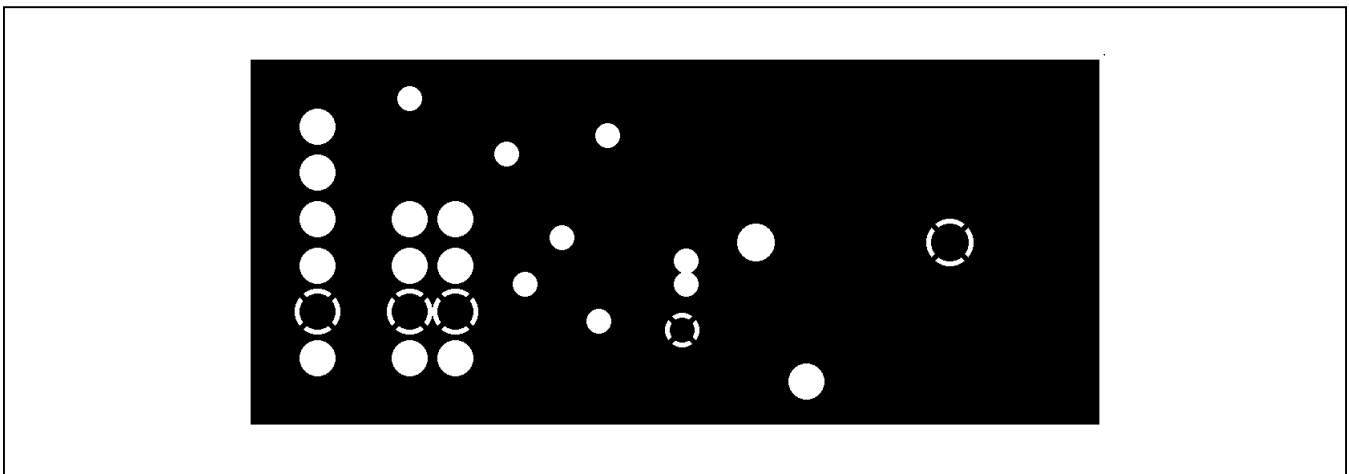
DS3231MPMB1 Peripheral Module PCB Layout—Inner Layer 1 (Power)
